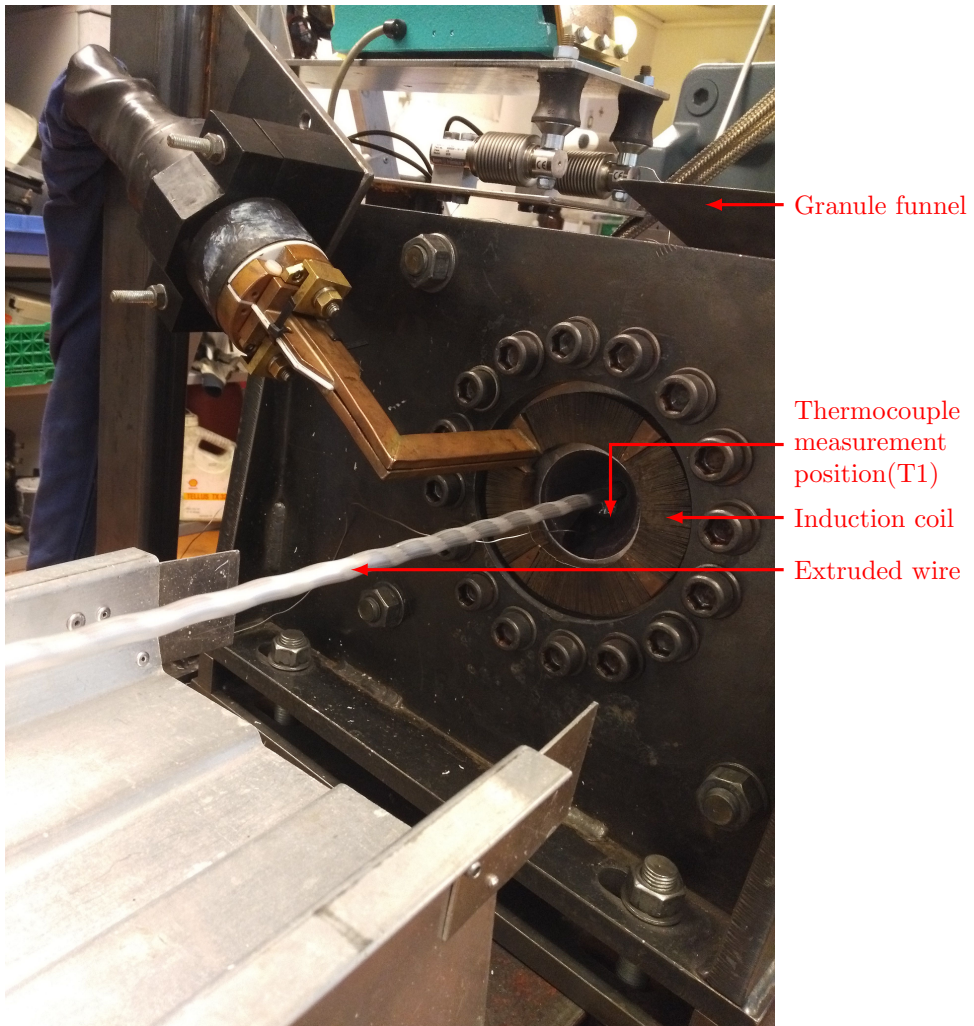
Close-up image of the screw extruder front during extrusion of the approx. 9.8 mm 4043+5183TiC wire, using a single flight screw.
